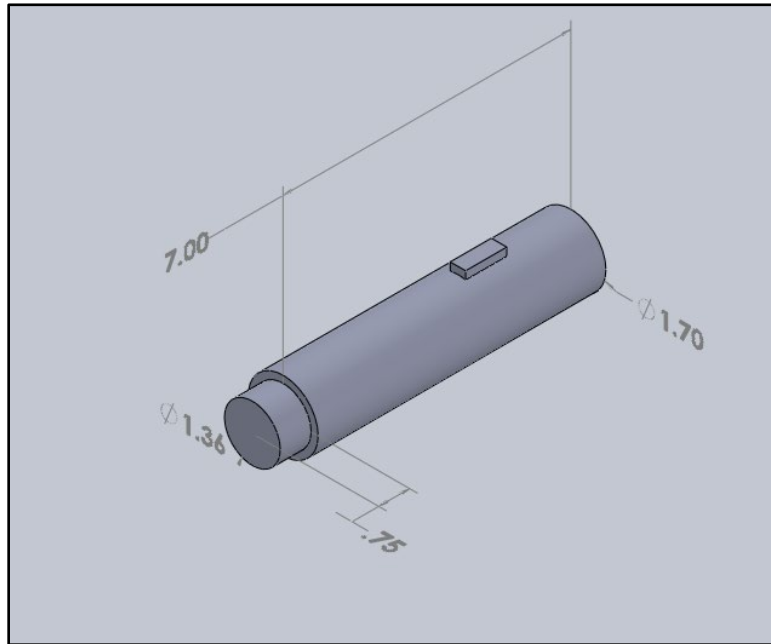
Input Shaft Isometric View (connects handle to input gear)
